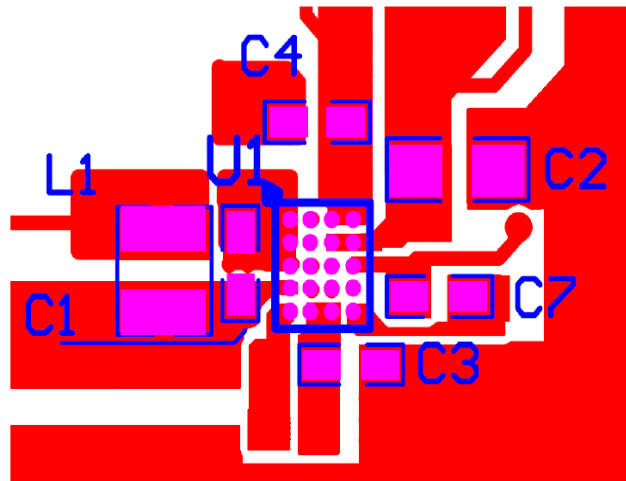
ISL98607R5576 RECOMMENDED PCB LAYOUT
